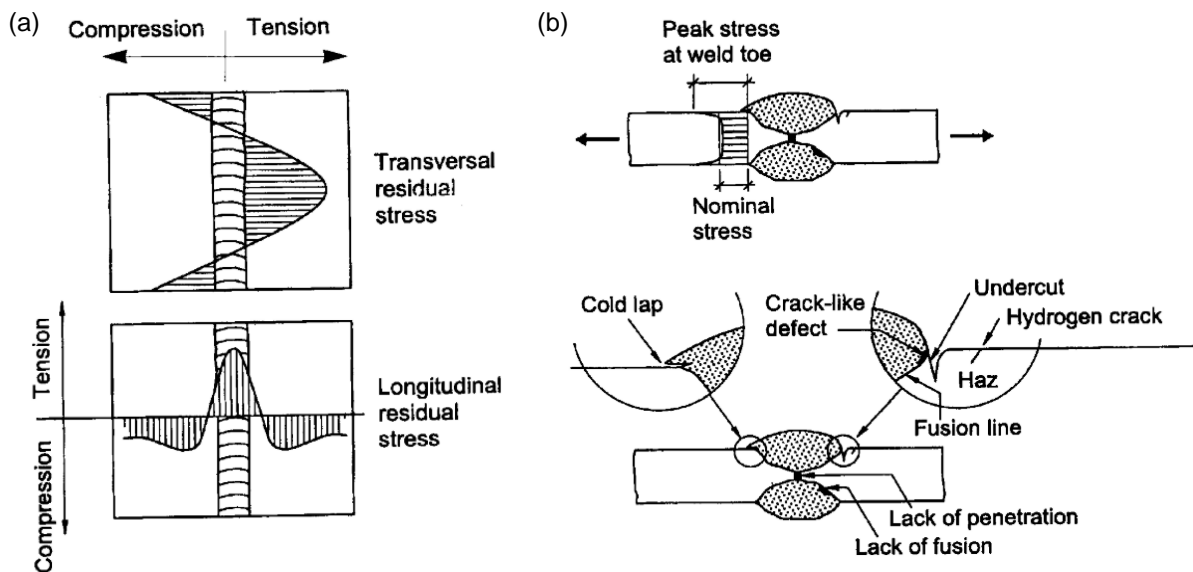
Conditions that will reduce the fatigue strength of welded joints [14]
